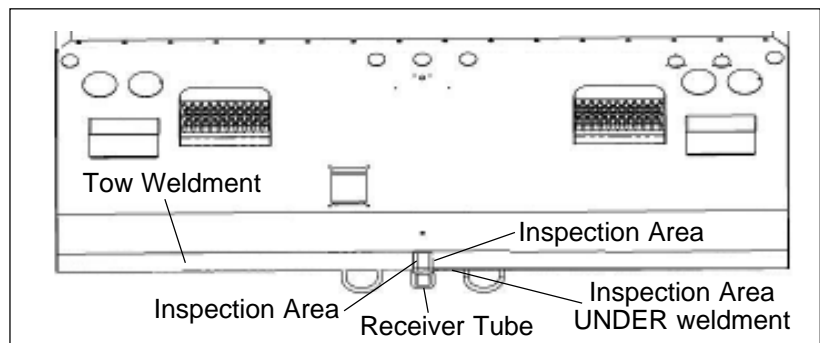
Tow Weldment Inspection, Type 2
